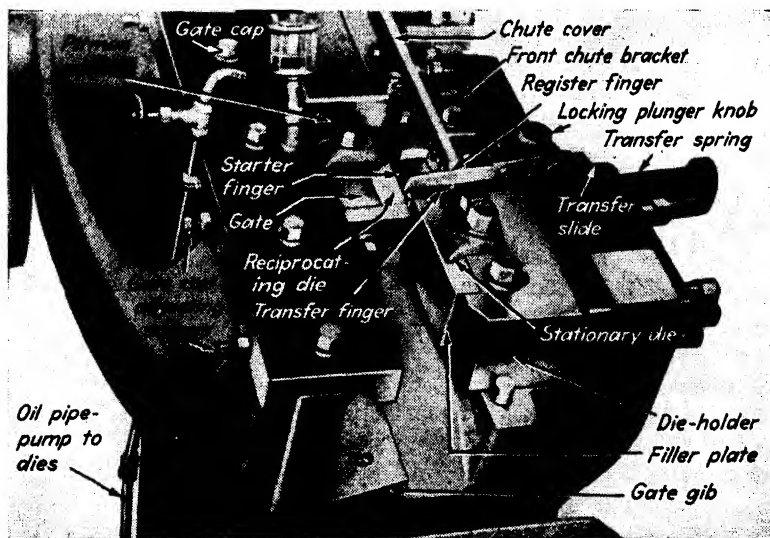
Flat-die thread roller of the Rolled Thread Die Company.
